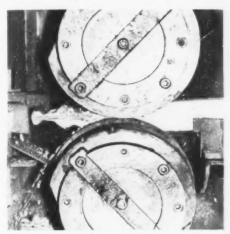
Heated crankshaft billets are reduced automatically in the rolls shown here. The billet passing through the rolls is being shaped to facilitate press forging.
